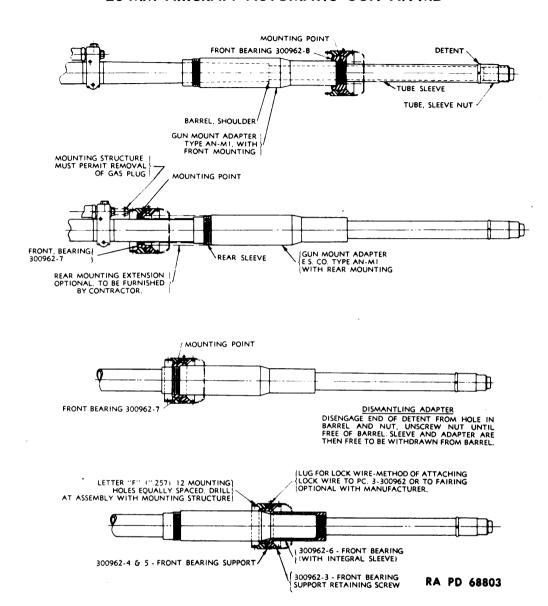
Mounting Arrangements of 20-MM AN-M1 Adapter on Naval Installations
